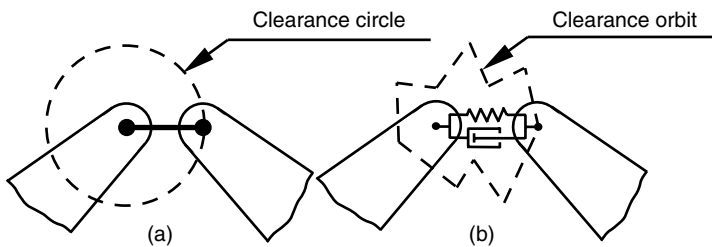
Examples of models for revolute joints with clearance: (a) massless link model; (b) spring–damper model
